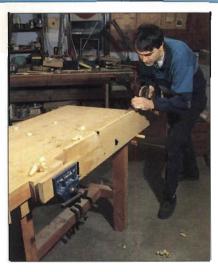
Photo C: A quick-action clamp secured to the bench leg helps support long boards for edge planing.
